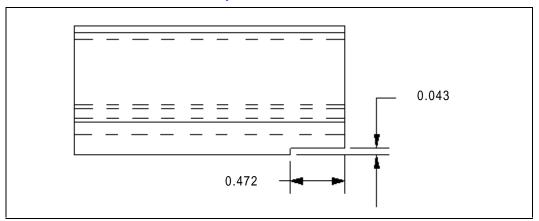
Dimensions of the Mechanical Step Feature in Heatsink Base
